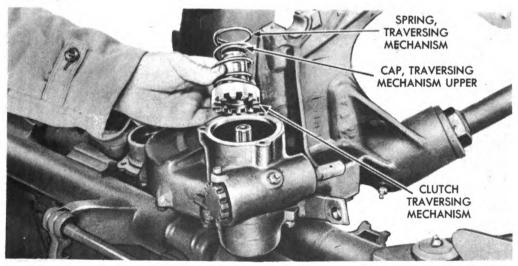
Removing the Traversing Mechanism Upper Cap, Traversing Mechanism Clutch, and Traversing Mechanism Spring
